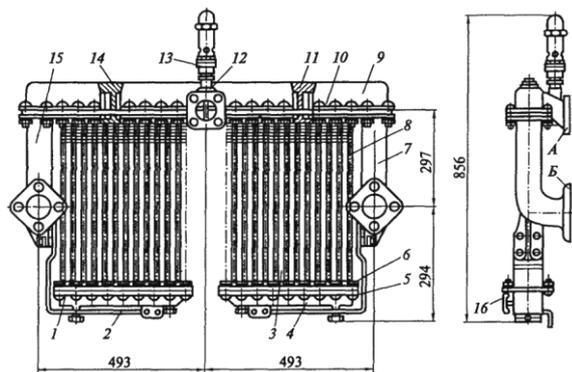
Radiator type compressor refrigerator KT6, KT7, KT6ЭЛ: 1,3 – radiator sections; 2,5 – connecting strips; 4 – bone bolt; 6,10,12 – flanges; 7,15 – branch pipes; 8 – copper tubes; 9 – upper collector; 11,14 – partitions; 13 – safety valve; 16 – drain cock; A,Б – flanges
